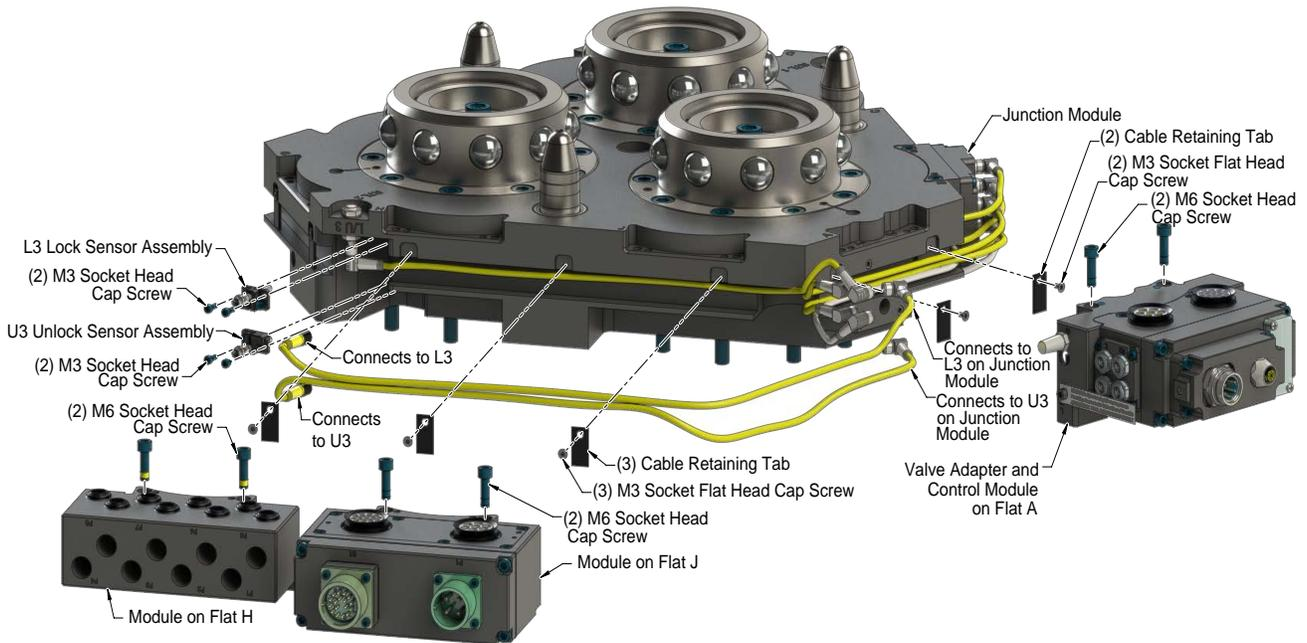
Lock/Unlock Sensor Removal and Installation
